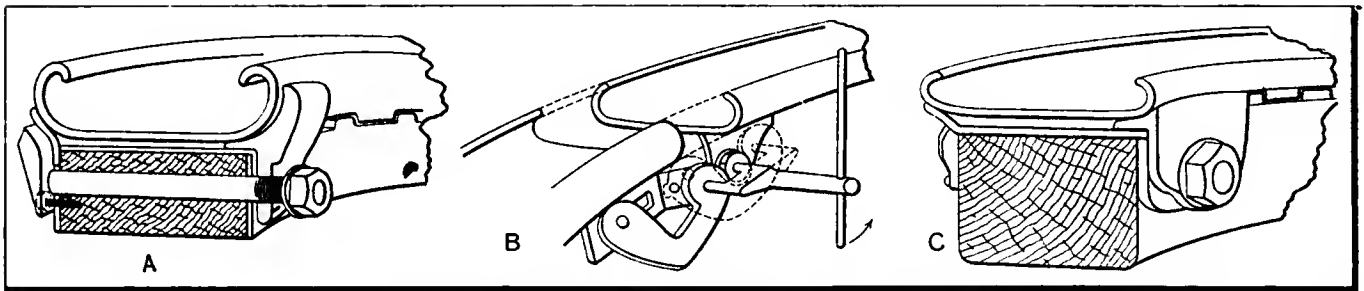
(A) Is a section of a Michelin demountable rim, (B) Shows method of locking the Universal demountable rim, (C) Offers the Continental demountable rim in section
